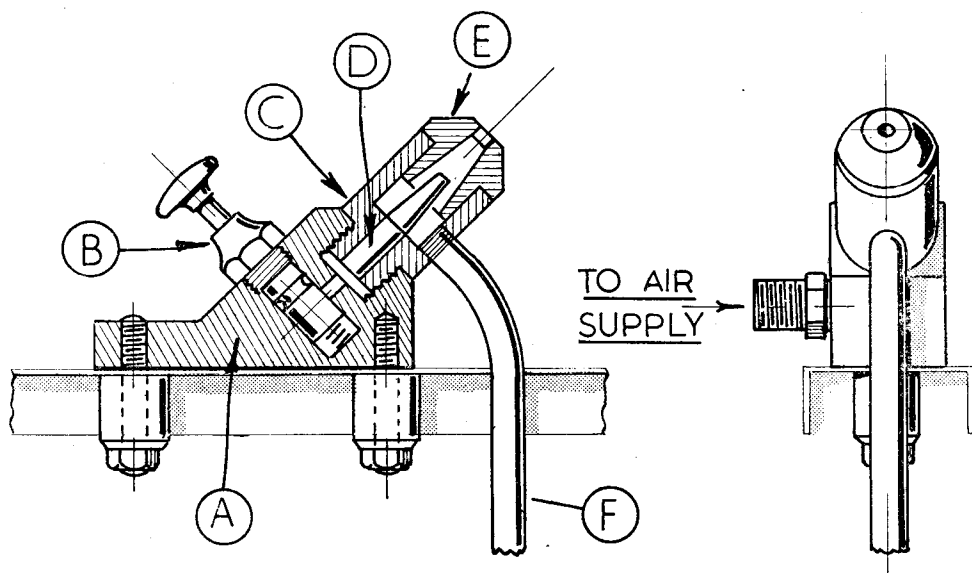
Details of the workshop gun. "A"—the body; "B"—the control valve; "C"—the nozzle base; "D"—the air jet; "E"—the combining cone; "F"—the sand pipe
